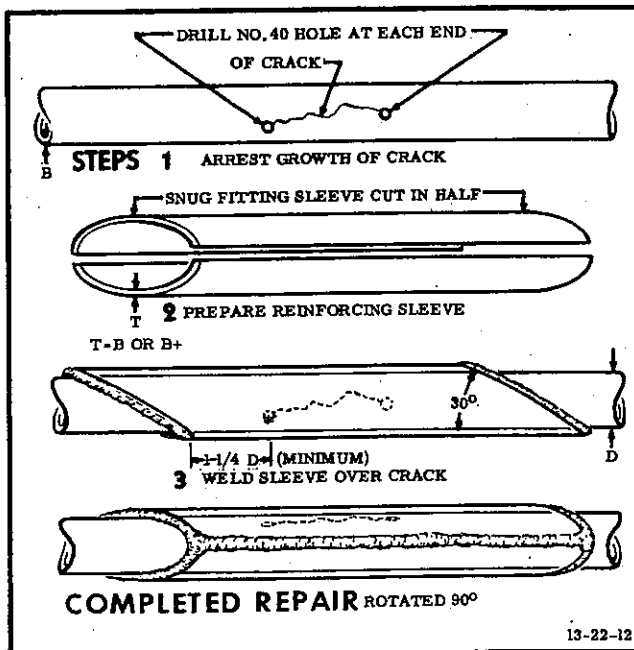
Dent or Crack Reinforcement in Steel Tubing
